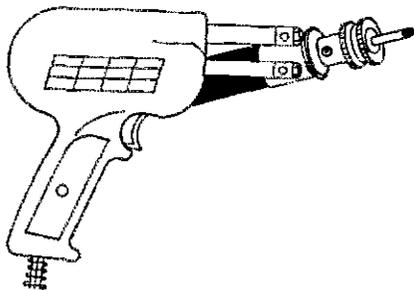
By using a soldering gun as shown, a neat and uniform connection can be made between coax braid and the inner shell of a coaxial fitting.
